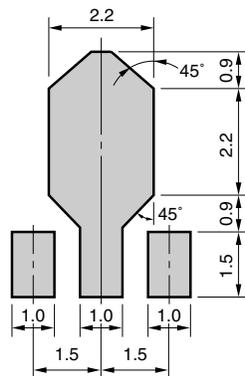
Dimensions of Mount Pad of SC-98
